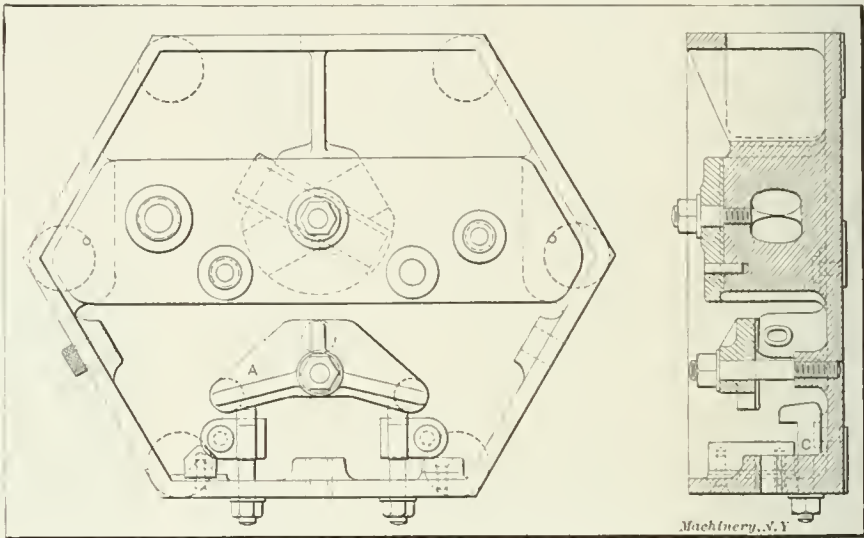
Jig for Drilling the Holes in the Steady-rest Part in Fig. 5
